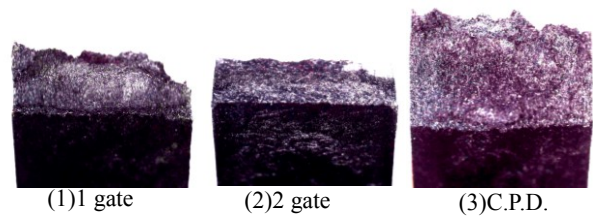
Fracture surface of bending test pieces (Thickness 3mm)
